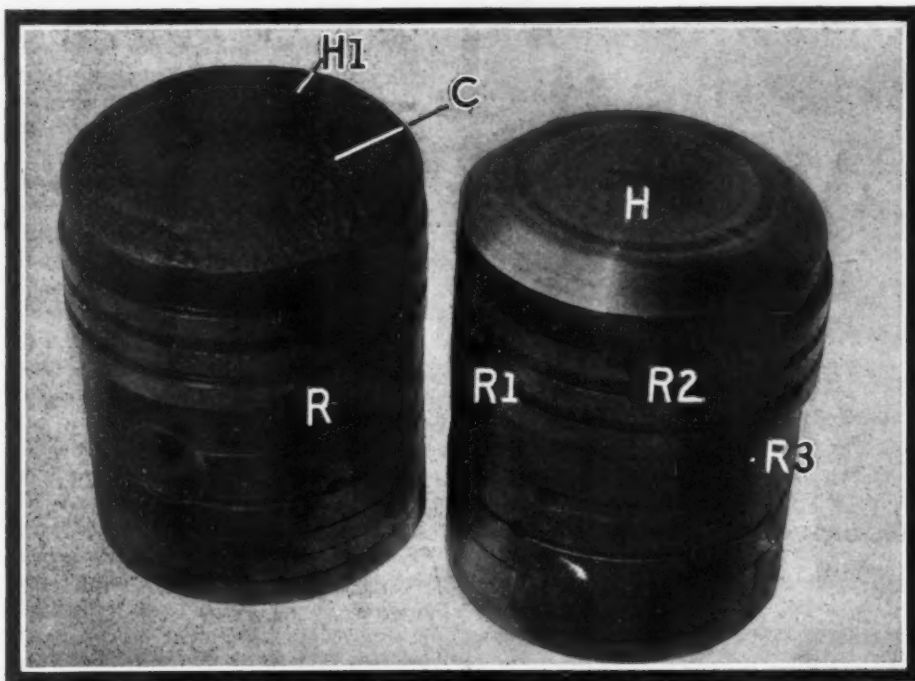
Showing a piston H1 removed from a motor that had been running for several months without attention. The other piston H was in exactly the same condition before being cleaned. The rings R1, R2 and R3 have been removed and the pit behind them extricated. (Photo taken at Cimlotti Garage)
